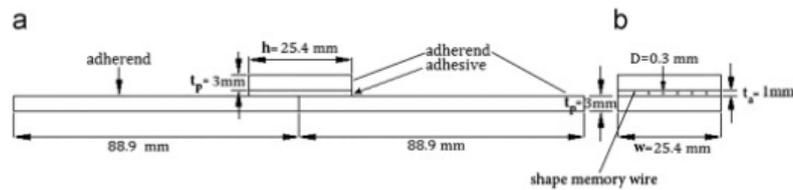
Detailed dimensions of single-strap adhesive joint reinforced by six SMA wires, (a) front view (b) side view.
